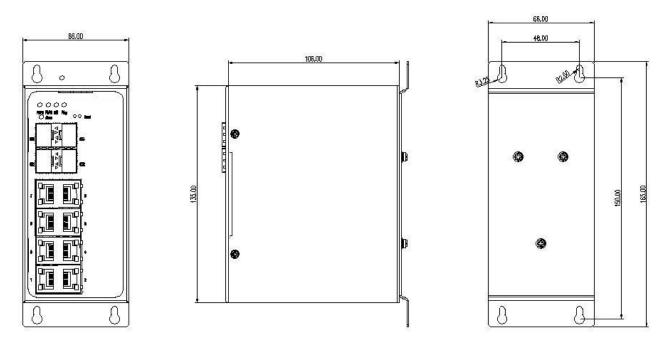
Dimensions for Small Products Panel Mounting(unit: mm)
